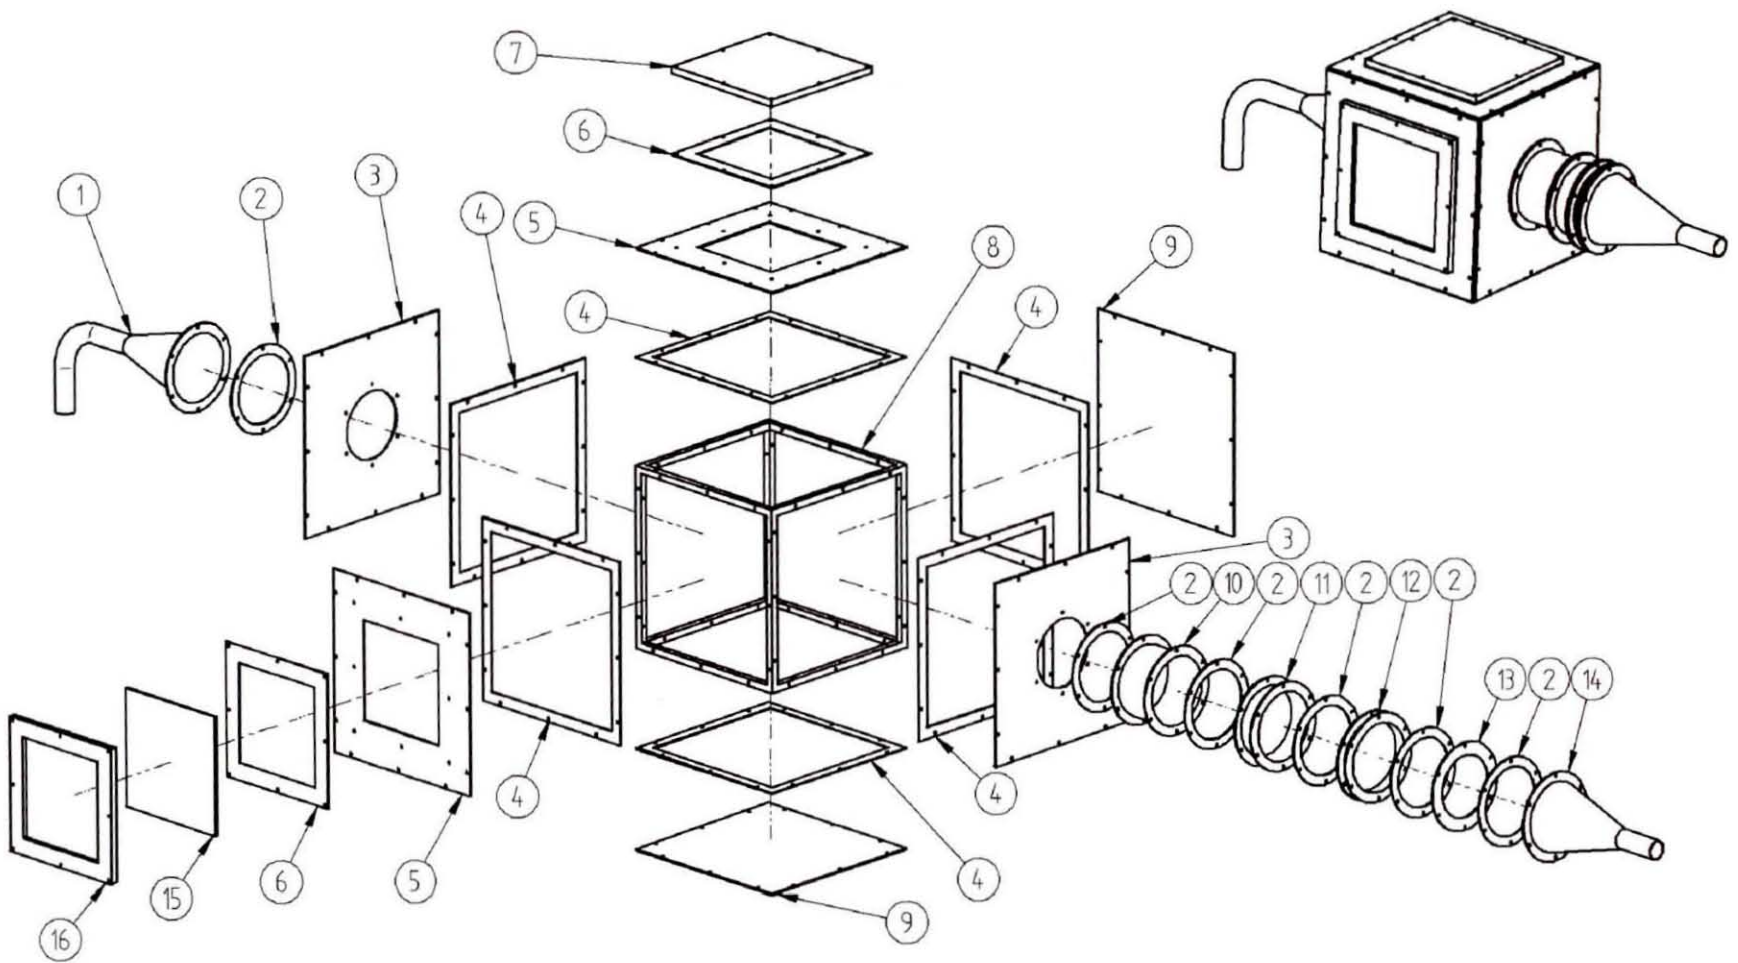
Exploded view of the modular structure of the observation chamber assembly. The numbers refer to components listed in Table 3.2
